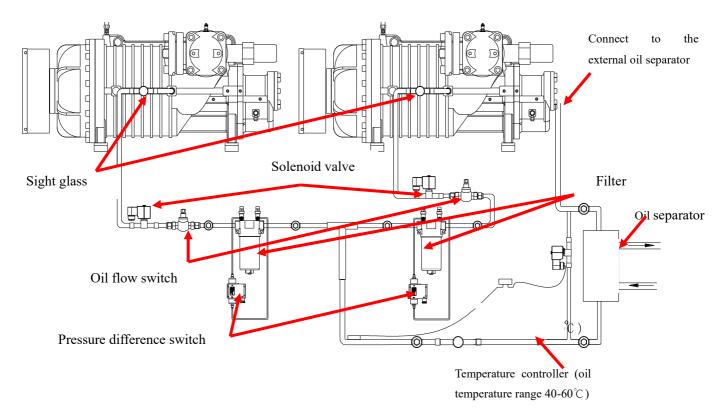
LB360/410-PLUS Piping drawing external oil circuit parallel connection
